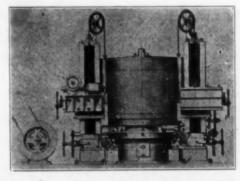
LATHE FOR UNWINDING COPPER STRIP.
